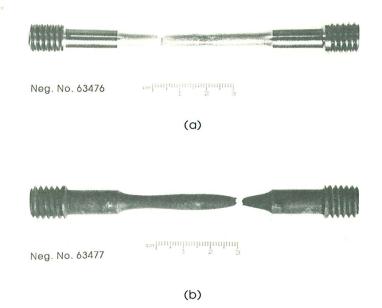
Transverse weld tensile tensile test specimens consisting of HR-120 plate and 556 filler metal.
